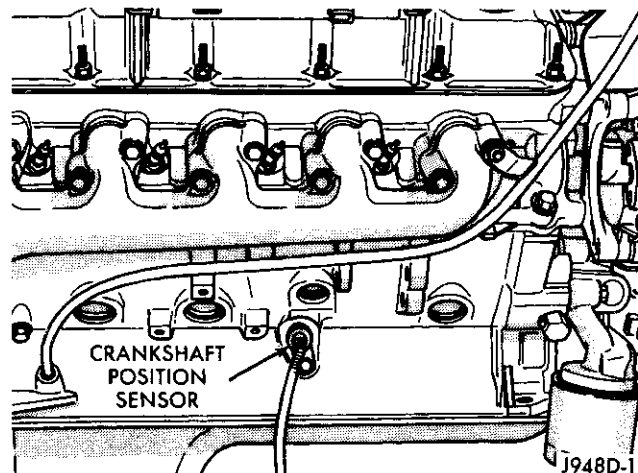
Crankshaft Position Sensor—8.0L Engine—Typical
